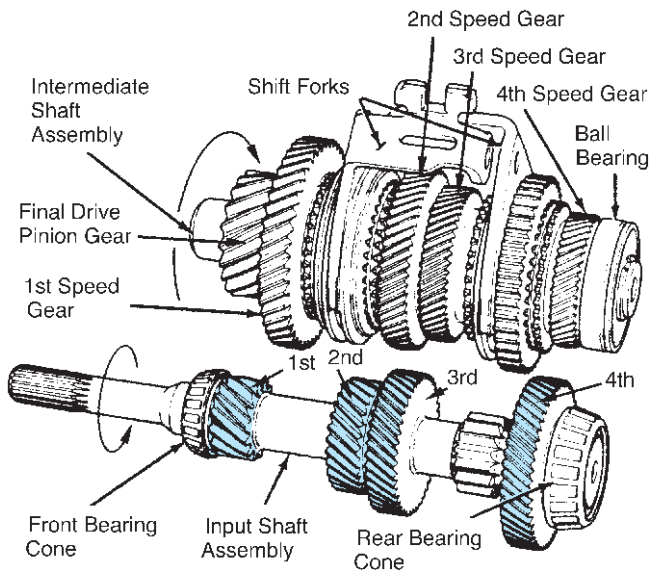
Gear set of a four-speed transaxle; note how first gear uses the smallest driving gear and the largest driven gear and how the gear sets change in size. (Courtesy of DaimlerChrysler Corporation)
